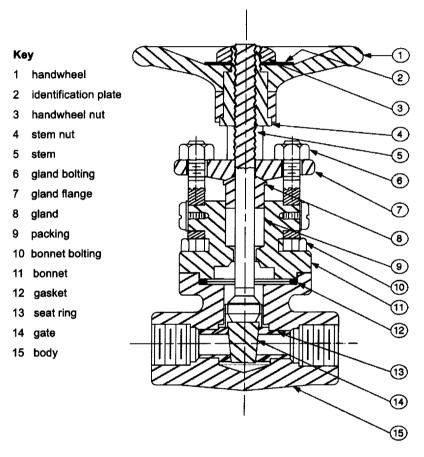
Outside Screw and Yoke Bolted Bonnet Gate Valve
